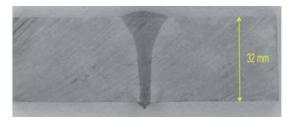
Type I butt joint made of 32 mm thick alloy steel (t=32 mm); laser power of 30 kW; even thick elements can be welded successfully
